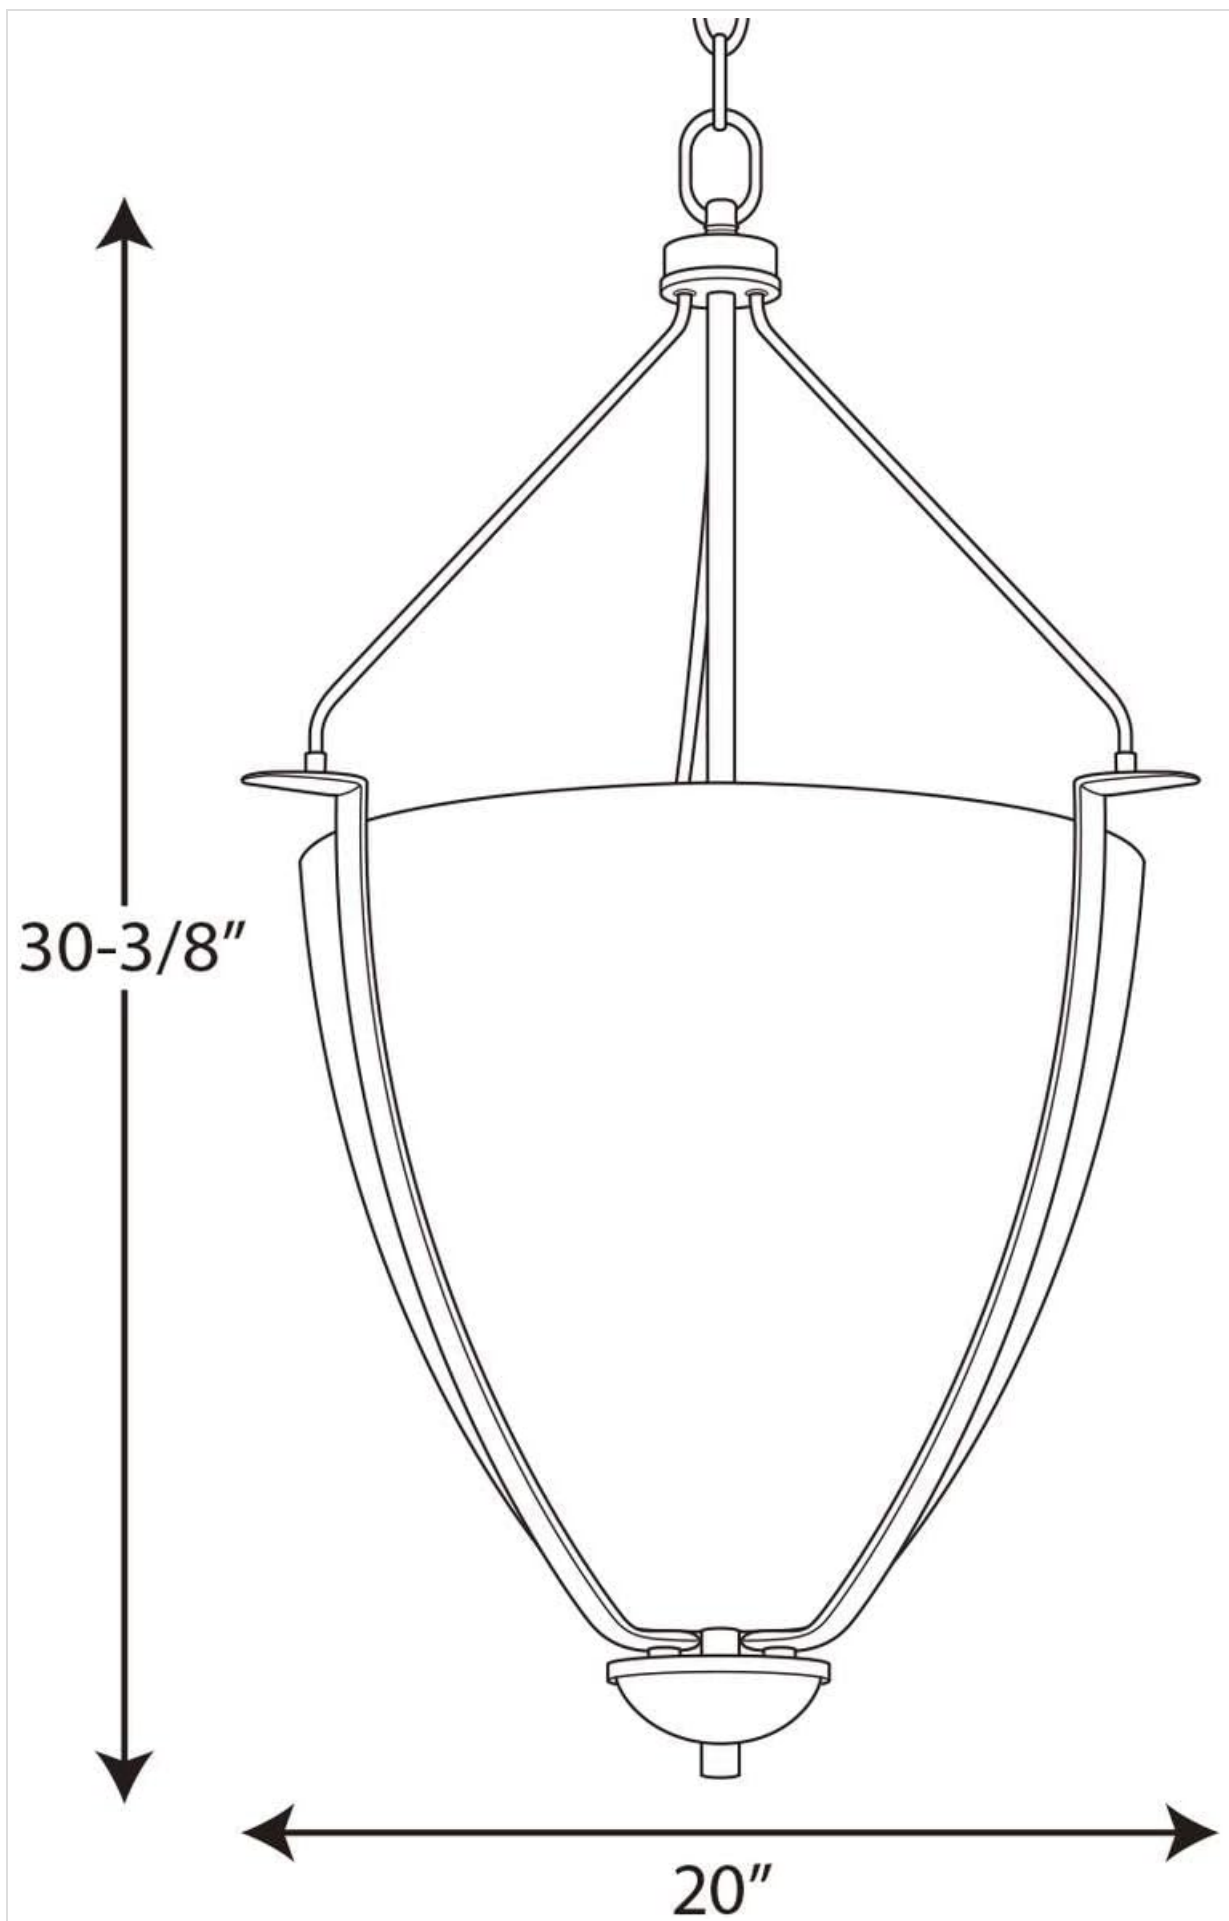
Fixture Dimensions. This diagram illustrates the overall height (30-3/8 inches) and width (20 inches) of the P3969-20W lighting fixture, crucial for planning installation space.
